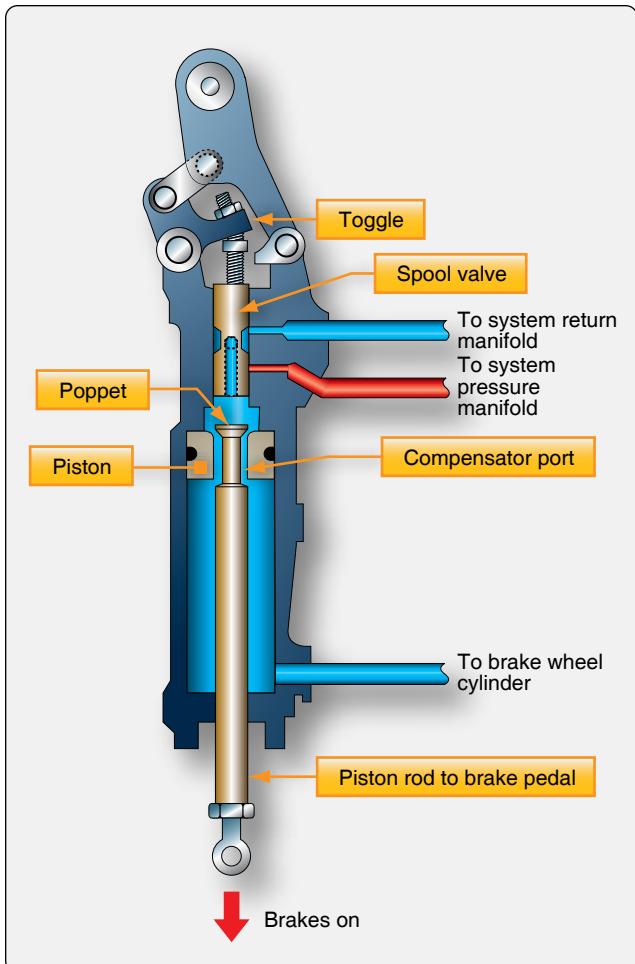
A master cylinder for a boosted brake system augments foot pedal pressure with aircraft system hydraulic pressure during heavy braking.
